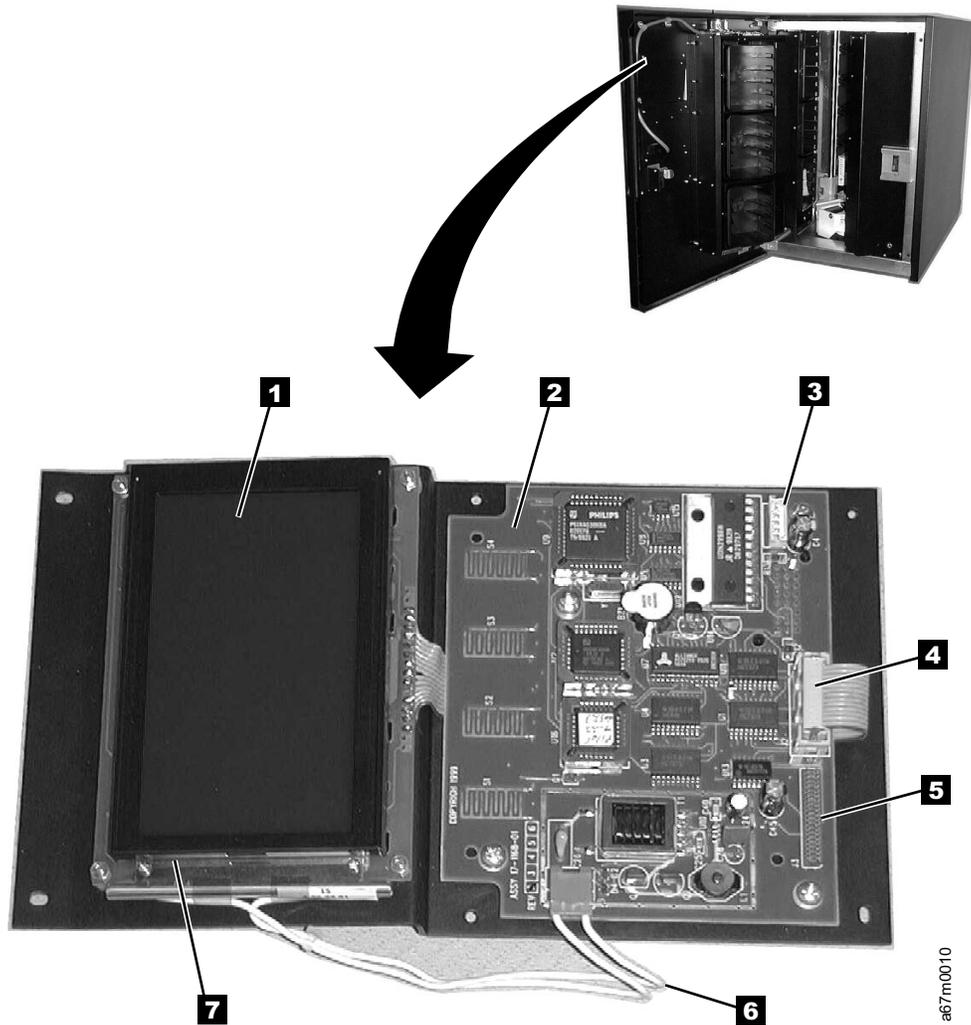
Operator panel assembly. The assembly supports both SCSI and native Fibre Channel attachment.
